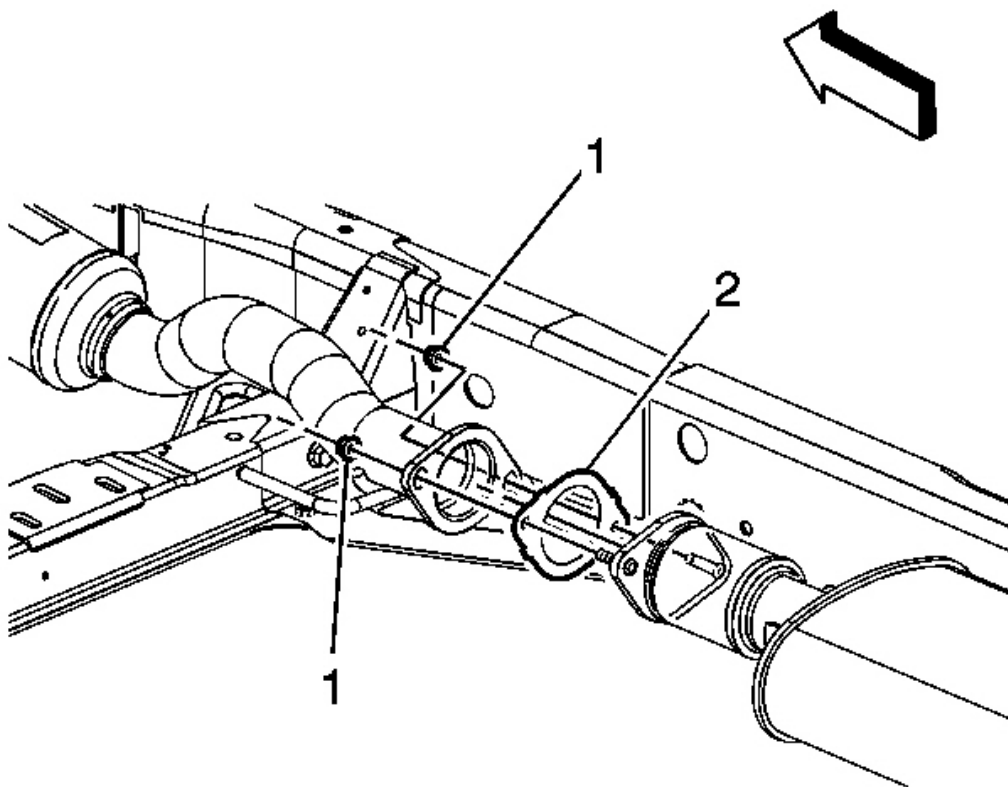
View Of Catalytic Converter, Muffler, Gasket & Nuts
